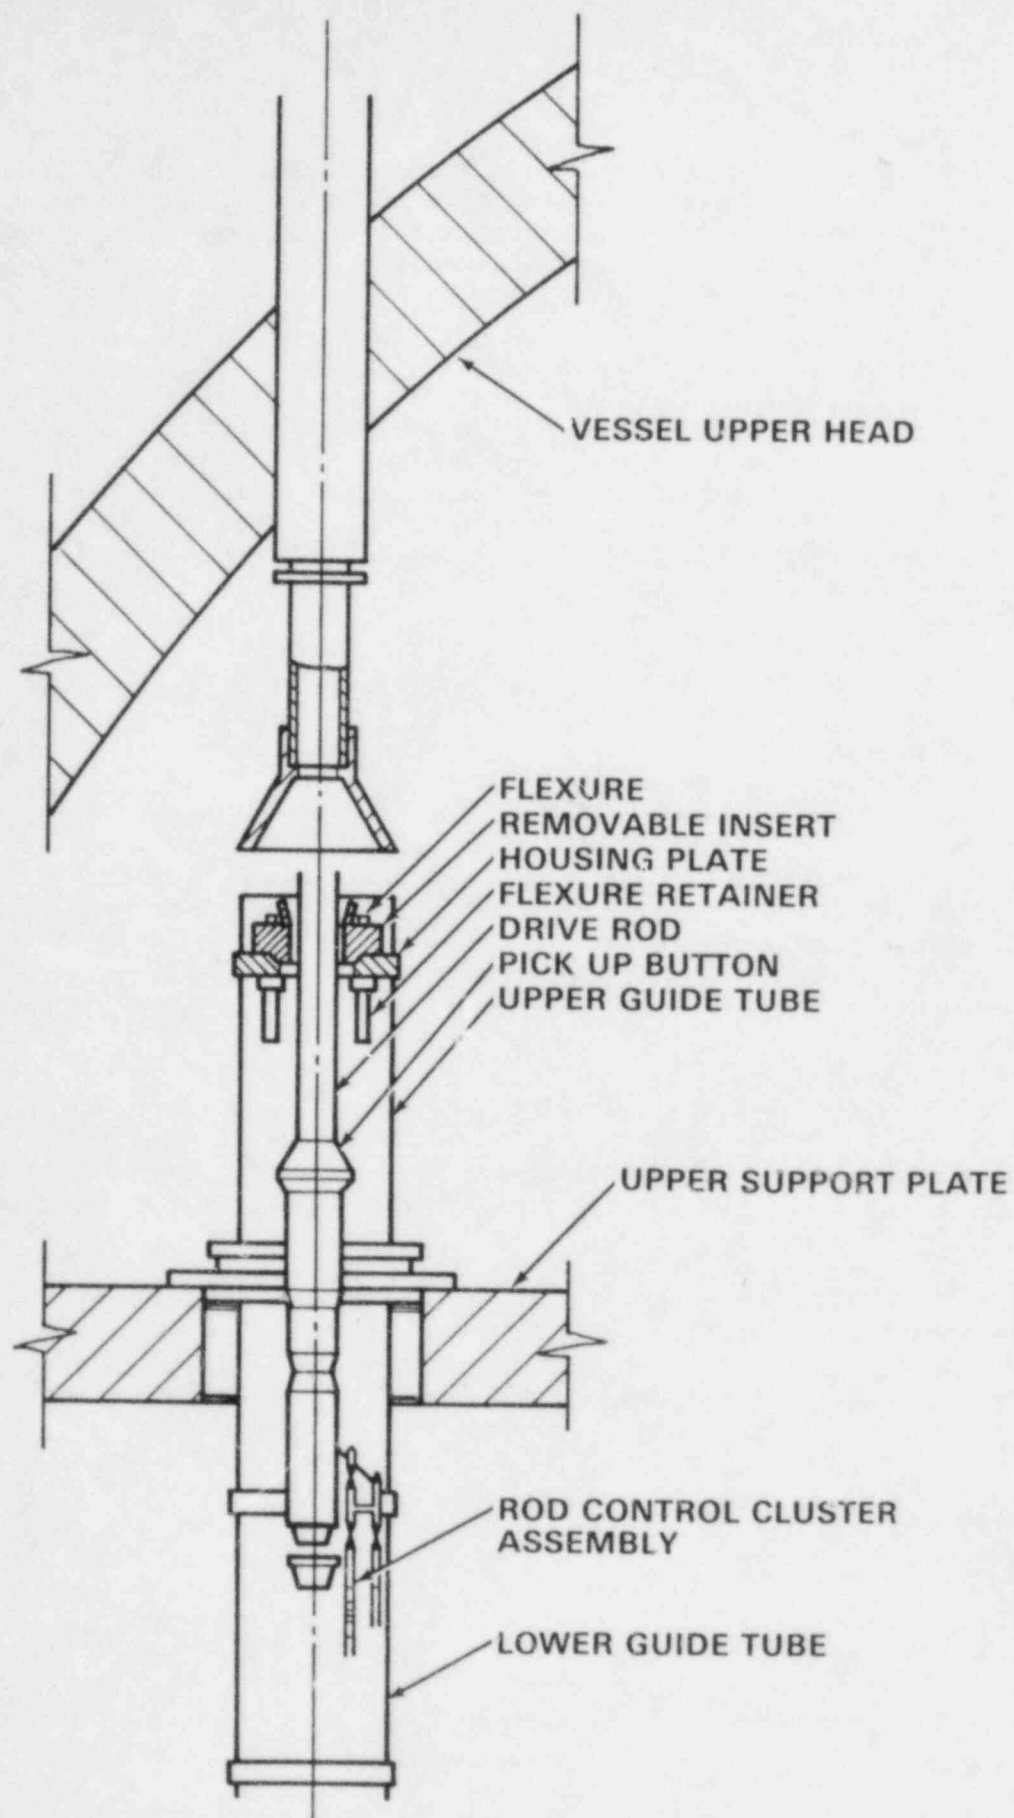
FLEXURES WITH ROD CONTROL CLUSTER ASSEMBLY FULLY WITHDRAWN
